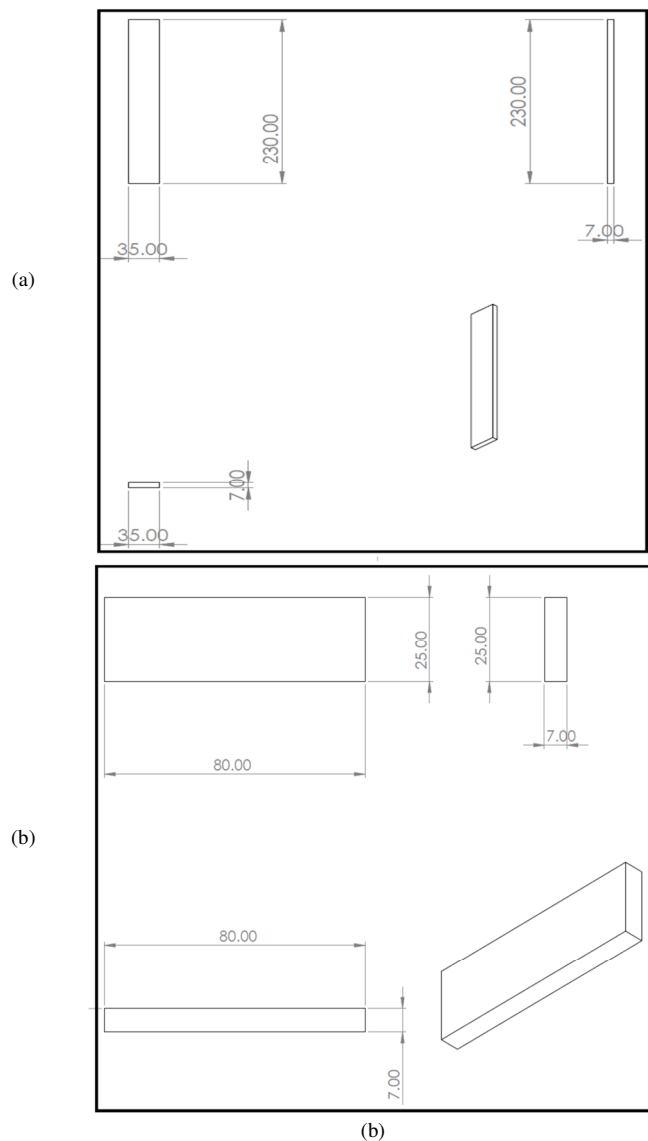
(a) Tensile test specimen and (b) Charpy impact test specimen. The dimensions are in mm.
